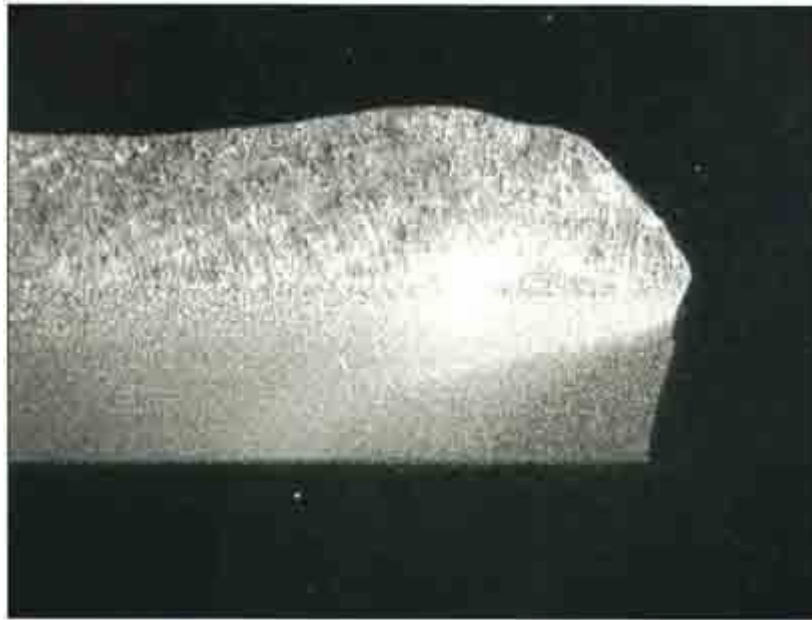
Photograph at 8x showing the fracture initiation site at the weld toe location. 2% nital.
